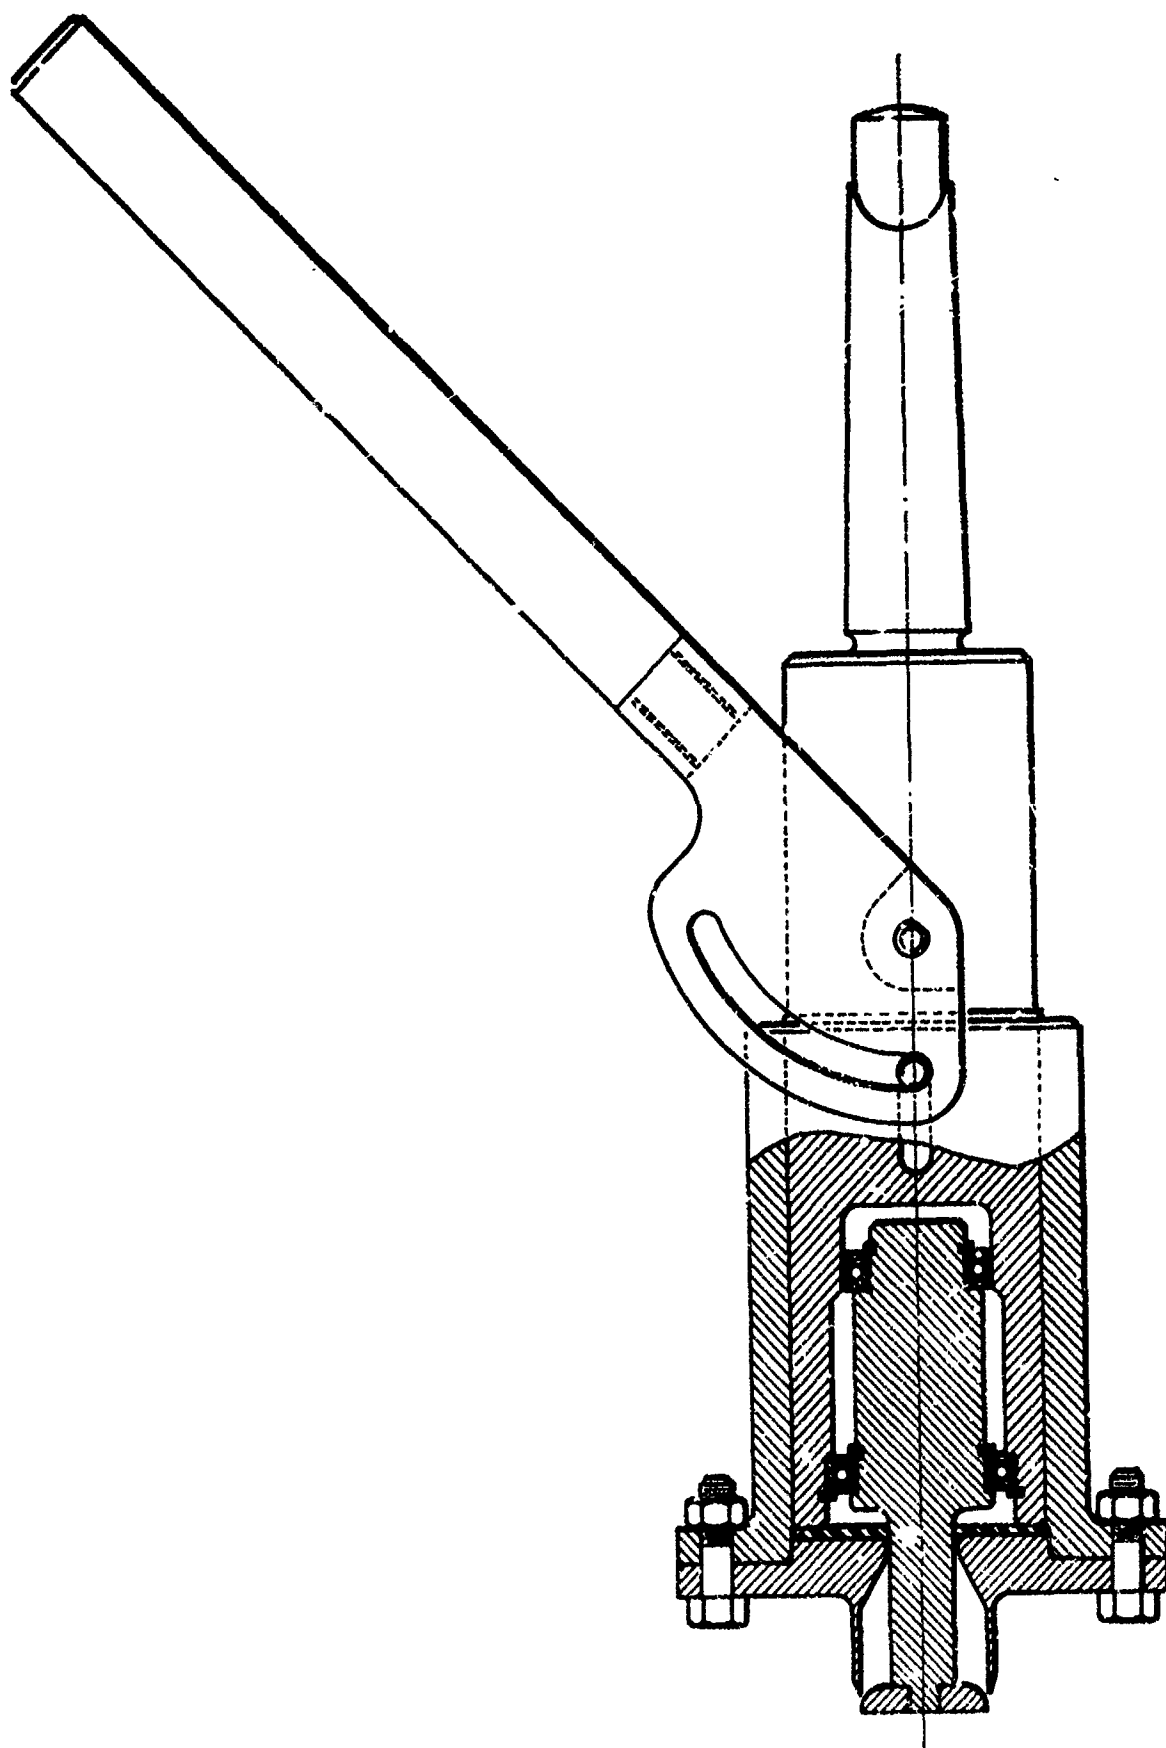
Apparatus for cutting through case bond to make round-flapped tensile sample.
